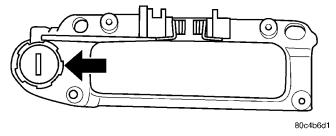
GLOVE BOX LOCK CYLINDER RELEASE TAB LOCATION
